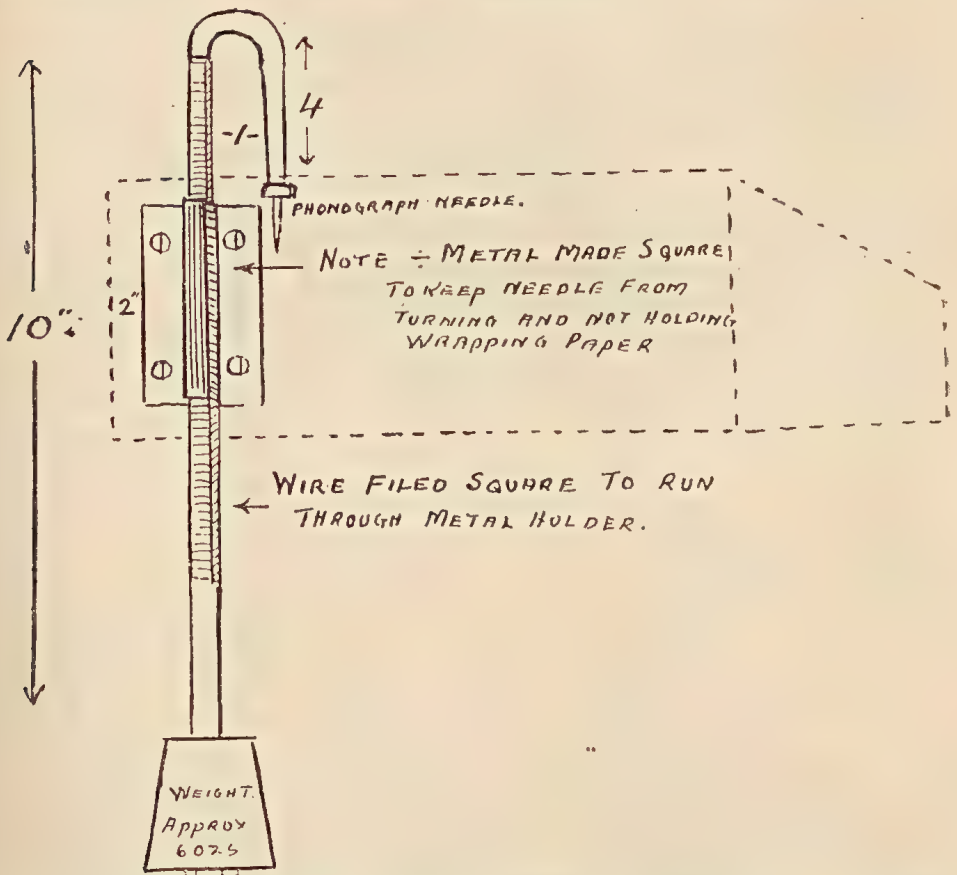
(Fig. 7).—PACKER'S NEEDLE TO HOLD WRAPPING PAPER IN POSITION. The paper holder is represented by dotted lines. The weight should be about 6 ounces.
